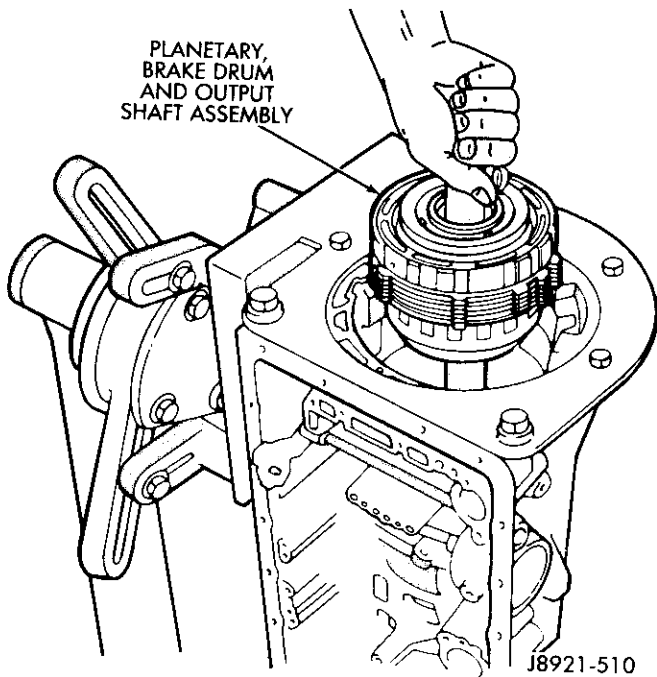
Removing Rear Planetary, Second Brake Drum And Output Shaft
